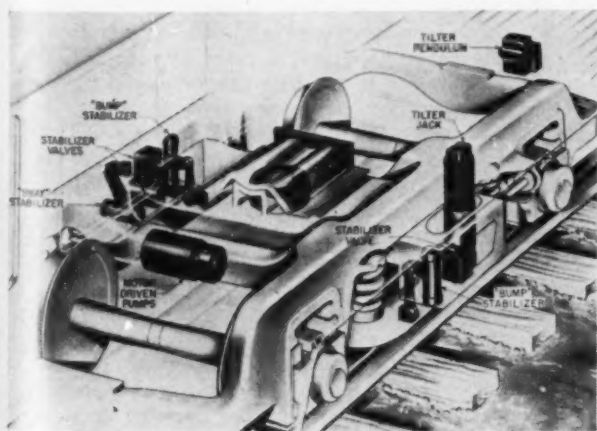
PHANTOM DRAWING SHOWING STABILIZER INSTALLED ON A RAILROAD CAR
